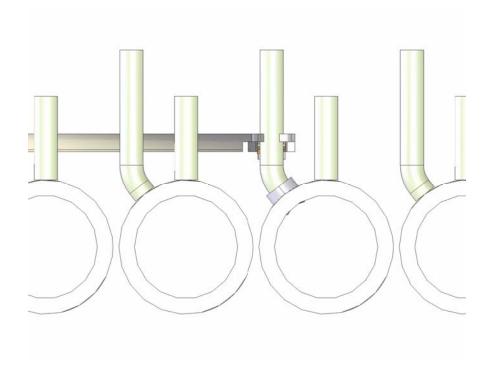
A Cross-Sectional View of the Fin Tube Severance Cutting Machine from the End of a Header Section.
